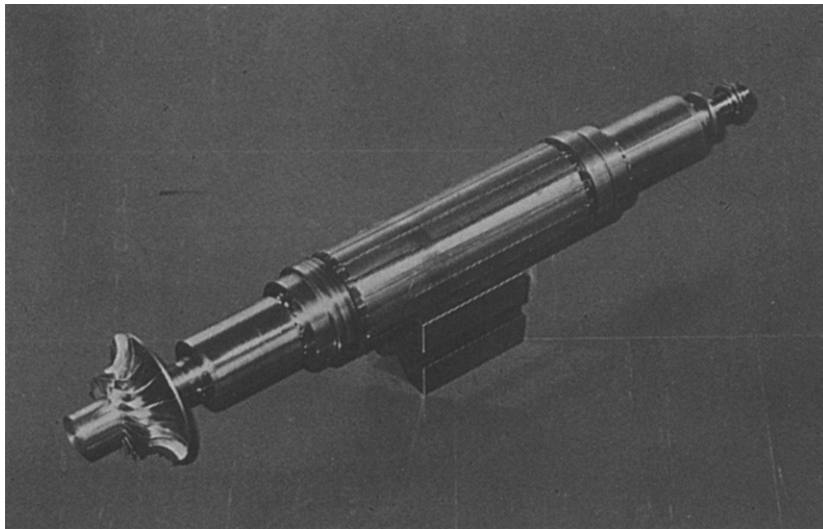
The rotor of the first prototype of the high-speed, process fluid lubricated turbogenerator-feed pump. From left to right: turbine rotor, generator rotor and feed pump rotor. Electric output  $100\text{ kW}_e$  at design conditions.
